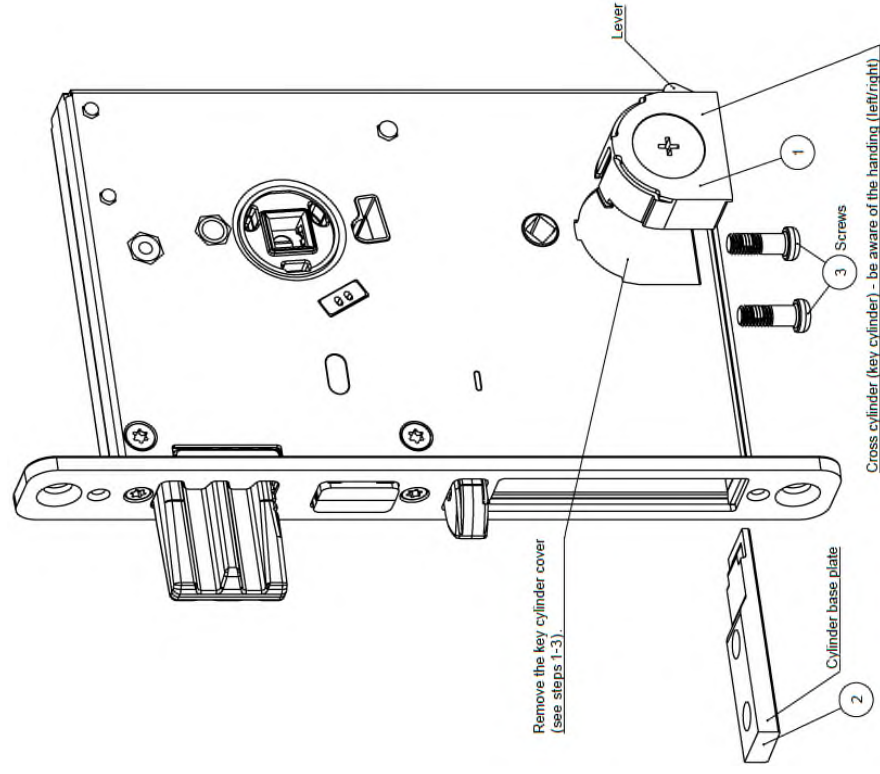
Key cylinder installation (position numbers refer to parts in [Figure 11](#))
